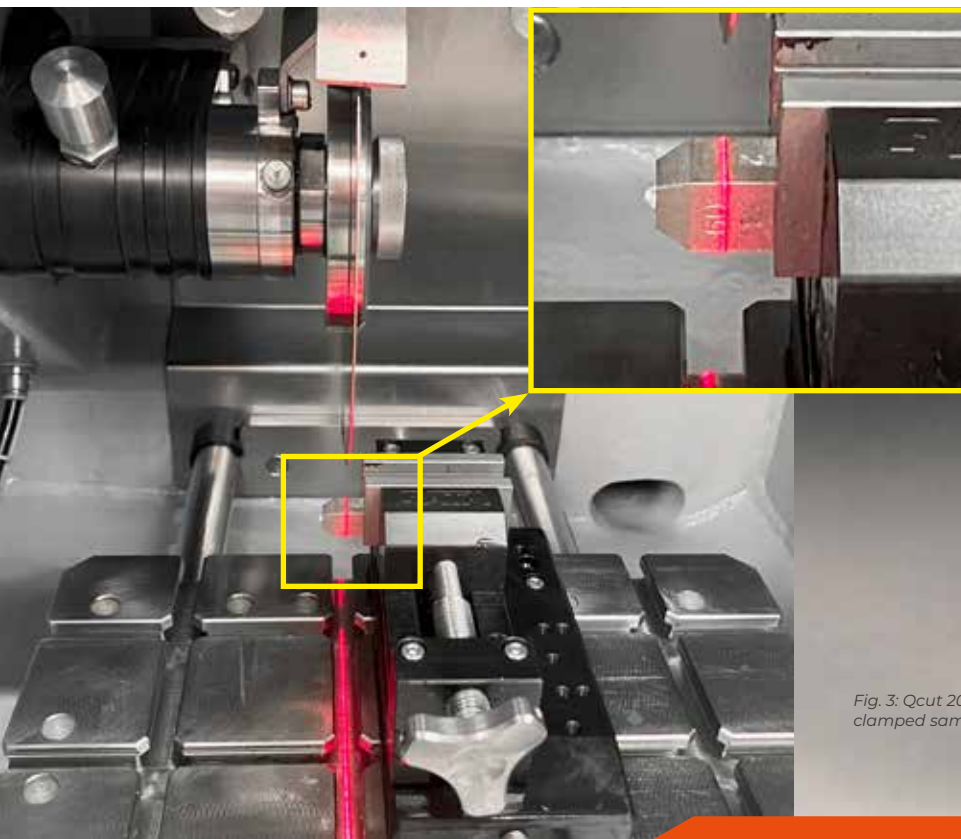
Qcut 200 A machine setup. Detail: clamped sample (clamping tool: Qtool 40 S)
